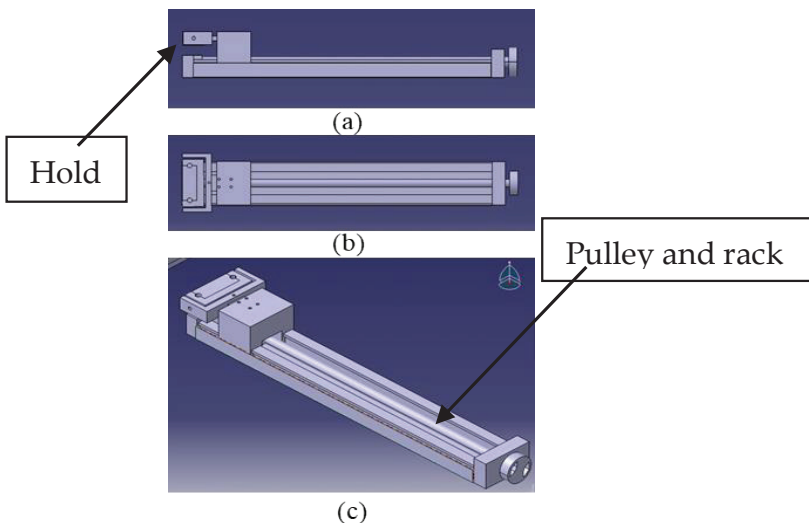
3D CAD of adjustable fixed arm: (a) side view, (b) top view and (c) isometric view
